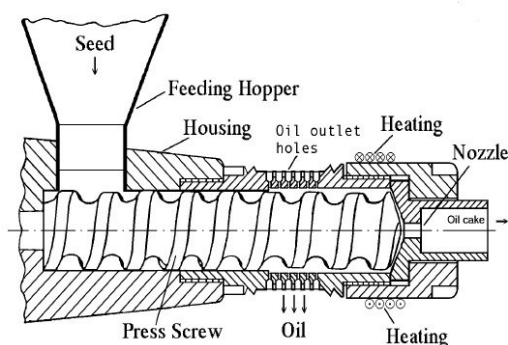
schematic drawing of hole cylinder type press. Notice the nozzle that can be changed. [2]
